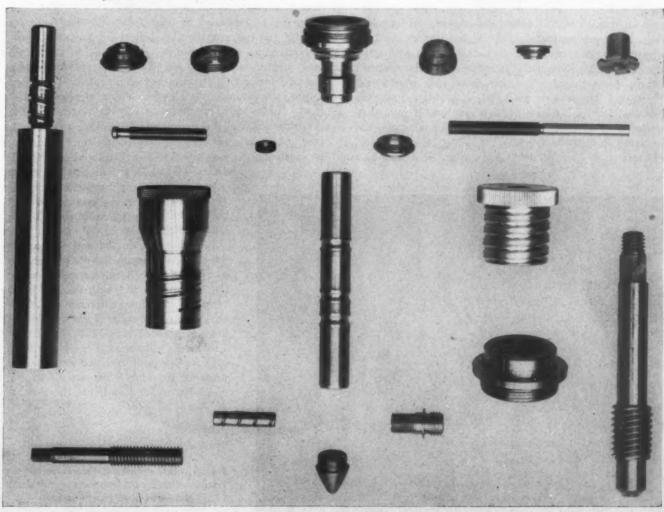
Right — A representative group of awkward machine parts the threads of which were rolled on a cylindrical-die machine
